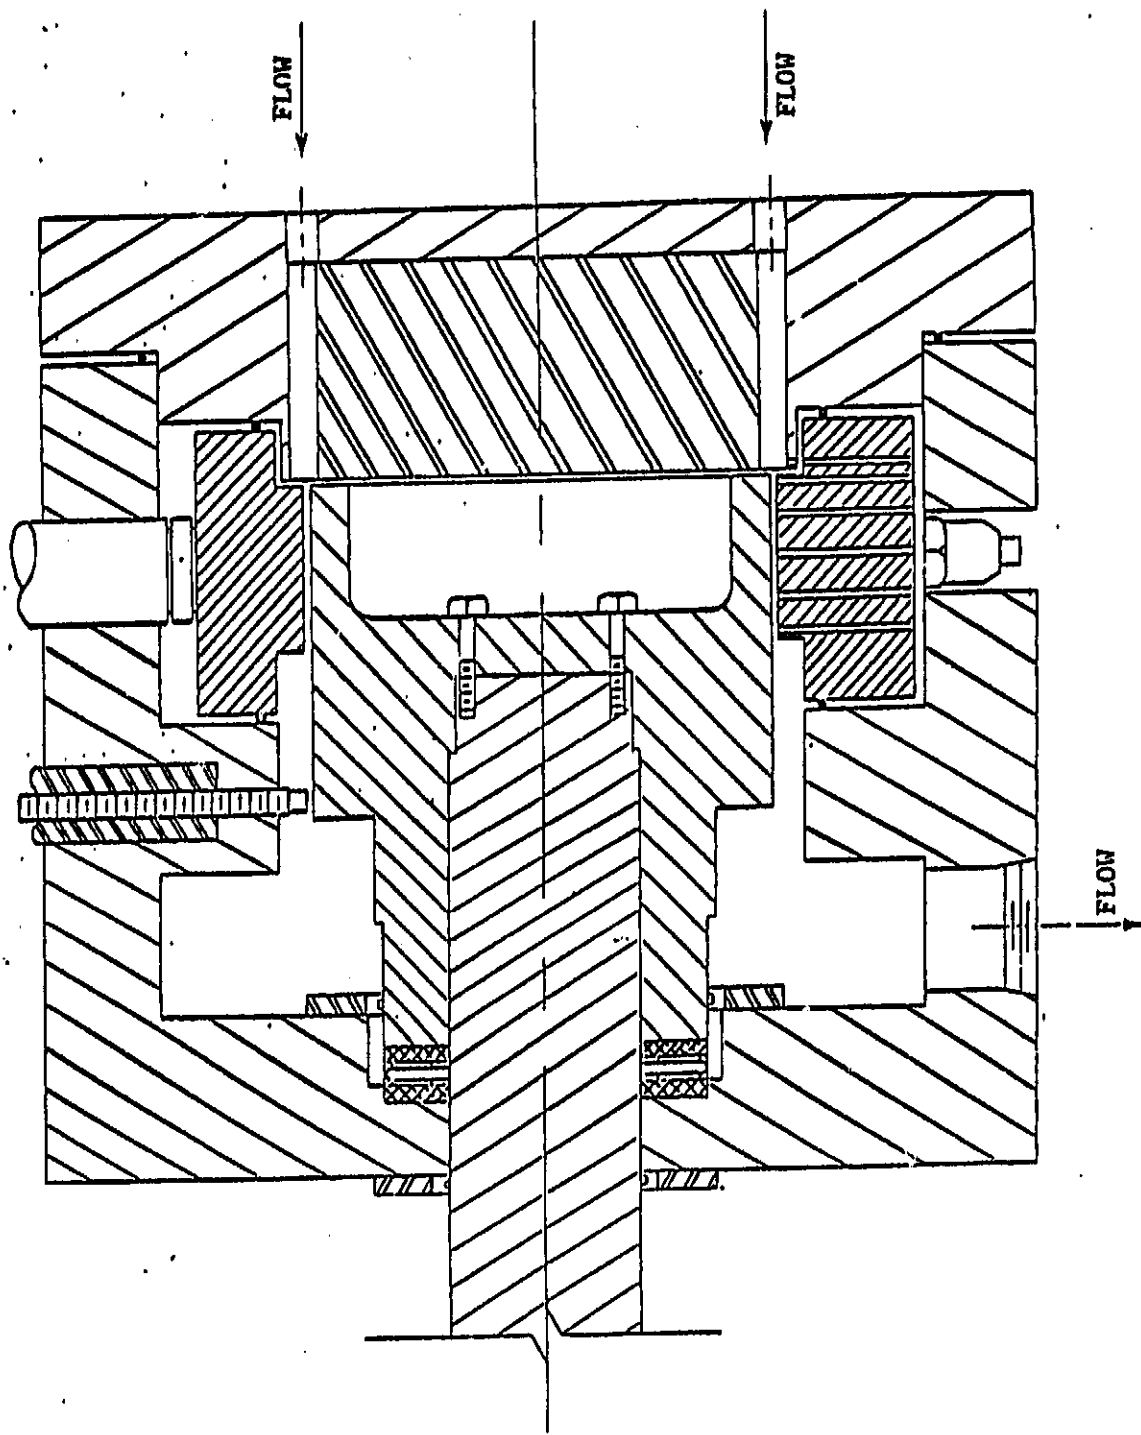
Typical cross-sectional view of test section showing smooth stator.
